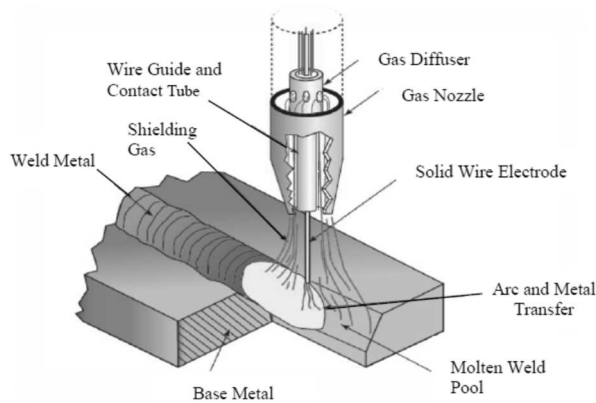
Schematic diagram of Gas Metal Arc Welding process
